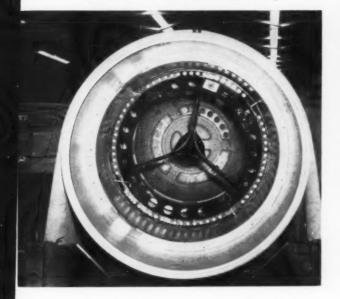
Components of Pressure Vessel for Helium Are Machined From Forged 17-7 PH Stainless Steel. Tank consists of two heads welded to a center shell section. Completed tanks appear in background
